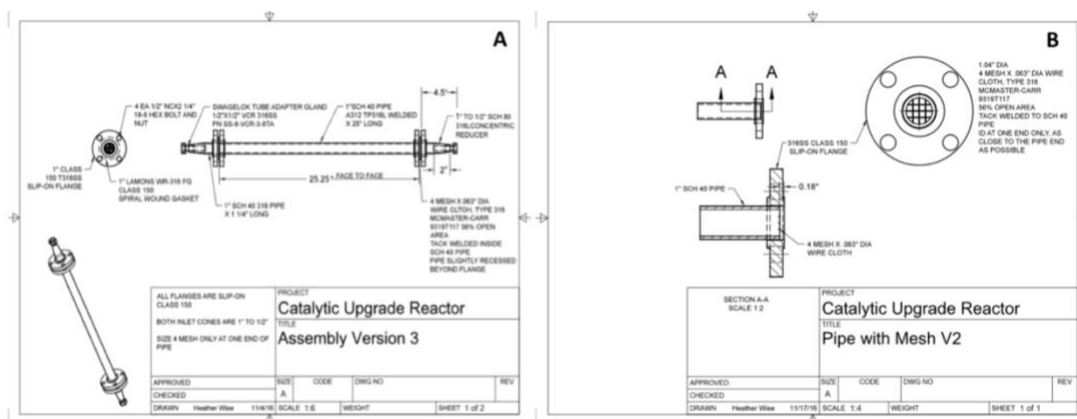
(A) Design drawings of ex-situ upgrade reactor with dimensions. (B) Cross section drawing of upgrade reactor and inset welded mesh for catalyst support.
